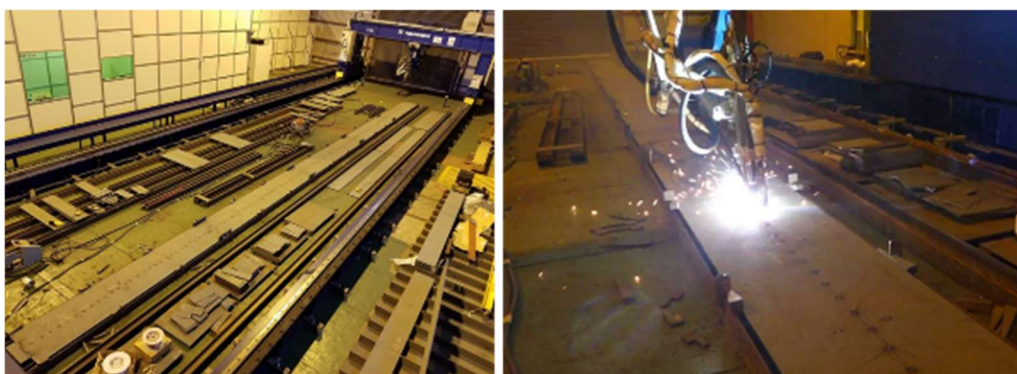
Trial fabrication of butt welded joints with a welding length of 15 m by laser-arc hybrid welding.
